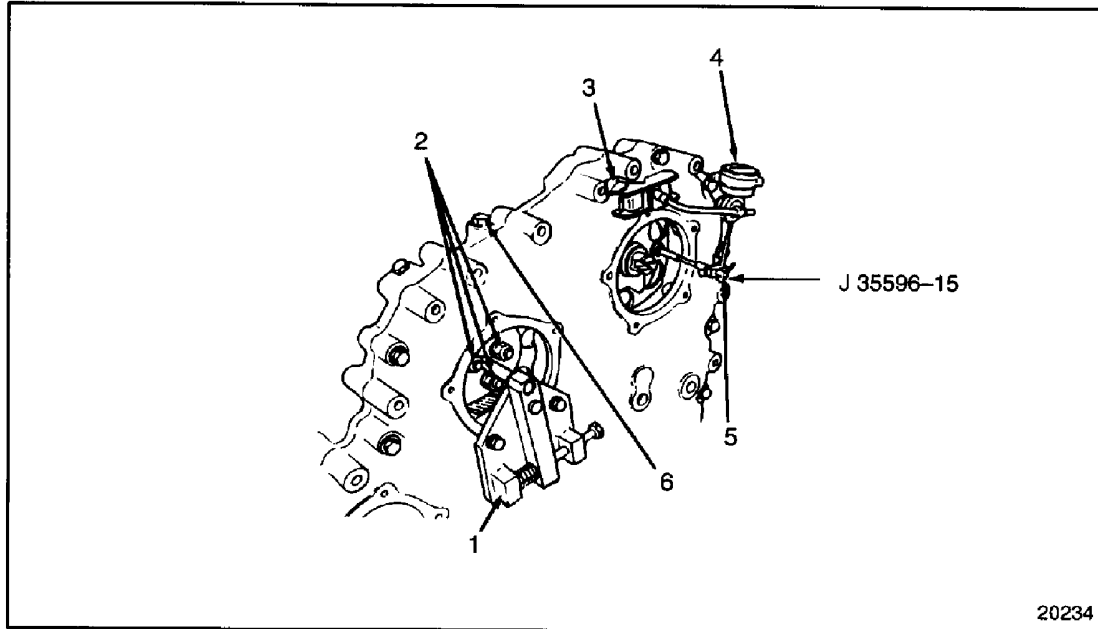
Camshaft Drive Gear-to-Adjustable Idler Gear Lash Measurement
